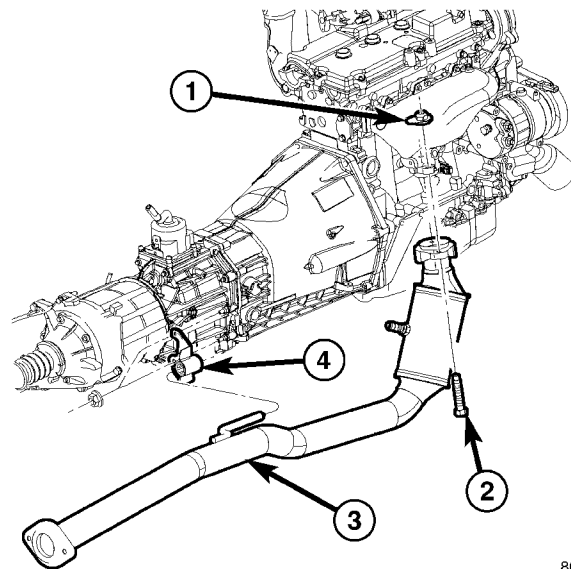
2.4L CATALYST ASSEMBLY - 4x4
